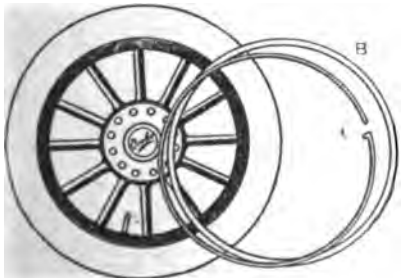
Side ring type of Q. D. rim. B—is the endless ring. O—is the other.
